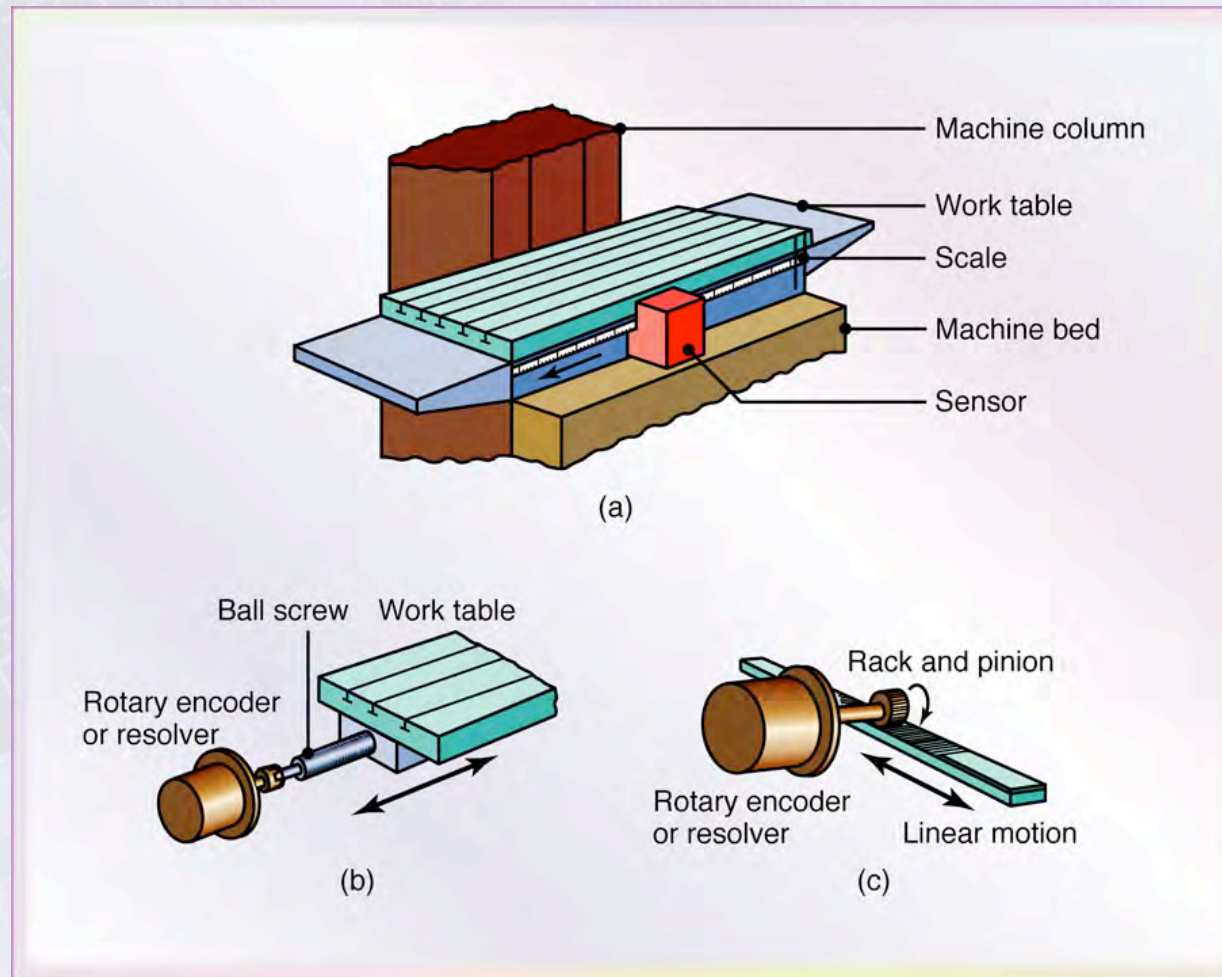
(a) Direct measurement of the linear displacement of a machine-tool work table. (b) and (c) Indirect measurement methods.
